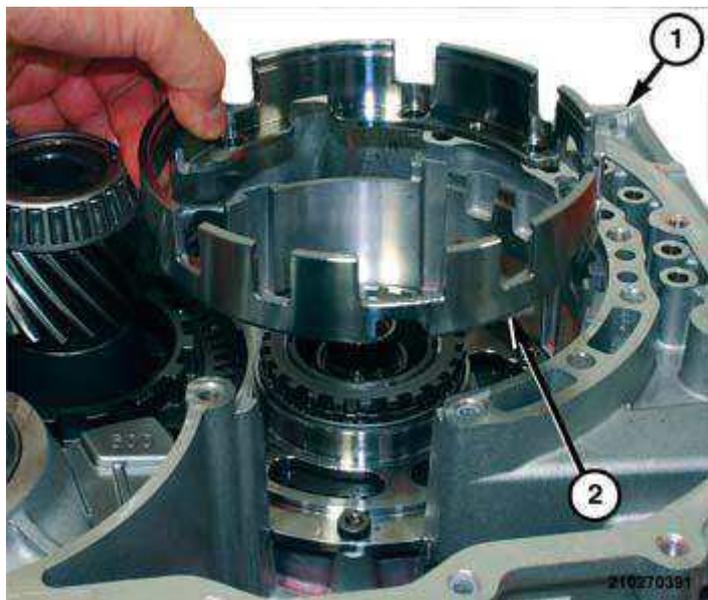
Underdrive Brake Retainer & Transaxle Housing
